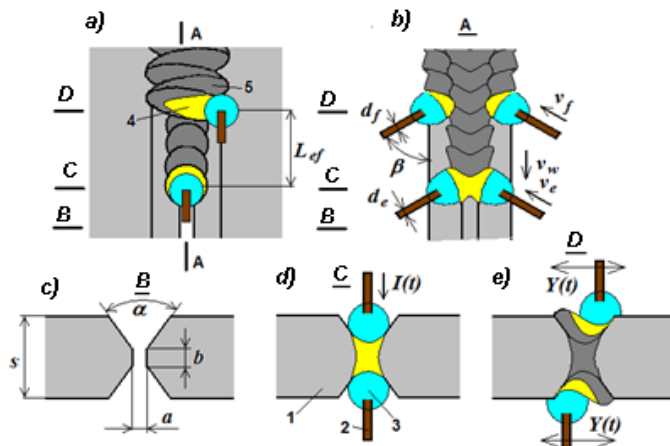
The schematic of the implementation of welding of vertical joints (a, b), cross section of the joint (c), and position of electrodes relative to the joint (g): 1 – parts of a groove weld; 2 – electrode wire; 3 – arc; 4 – weld pool; 5 – weld seam.
